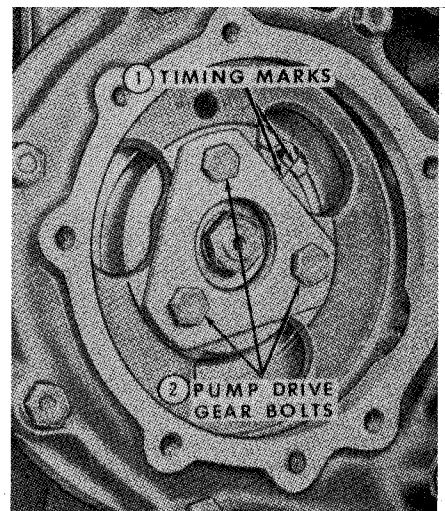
Pump drive gear cover is removed to show timing marks on drive gear adapter hub and on pump housing.
